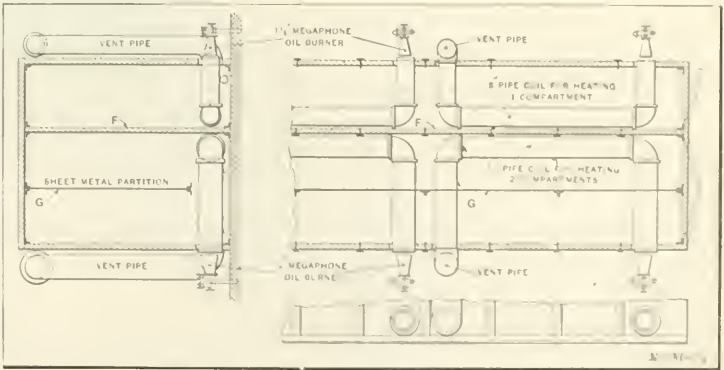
Sectional View of Ovens, showing Method of installing Pipe Coils for Fuel Oil Heating
